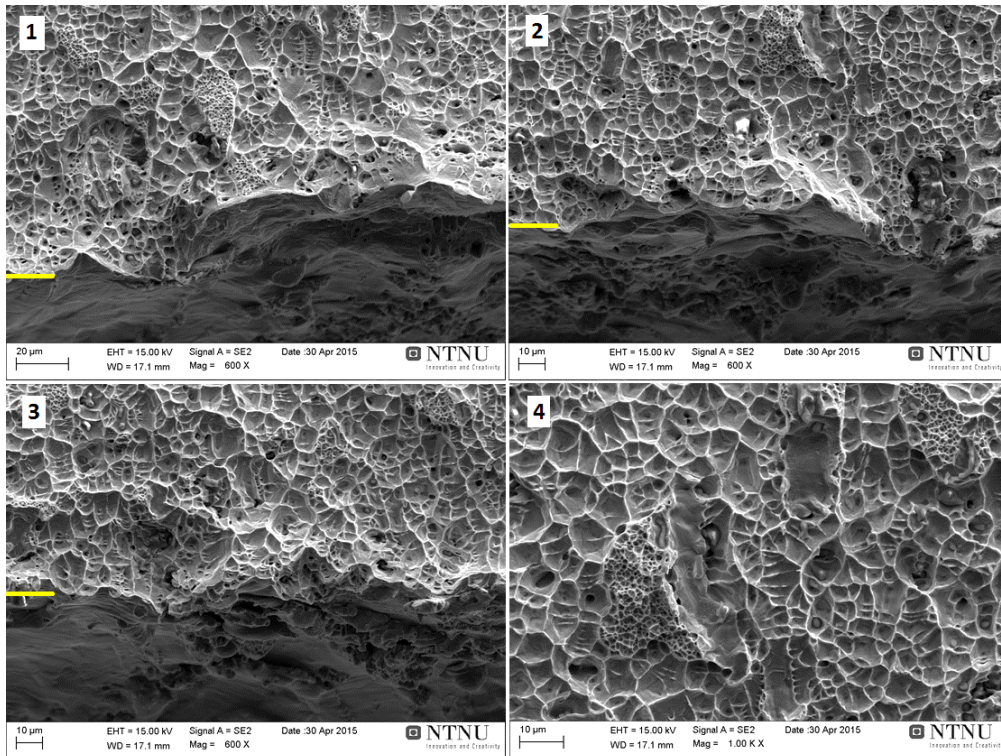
Sample A, test 3, clad section of specimen. The fracture surface is above the yellow line. The areas 1-4 are indicated in Figure 72 above.
